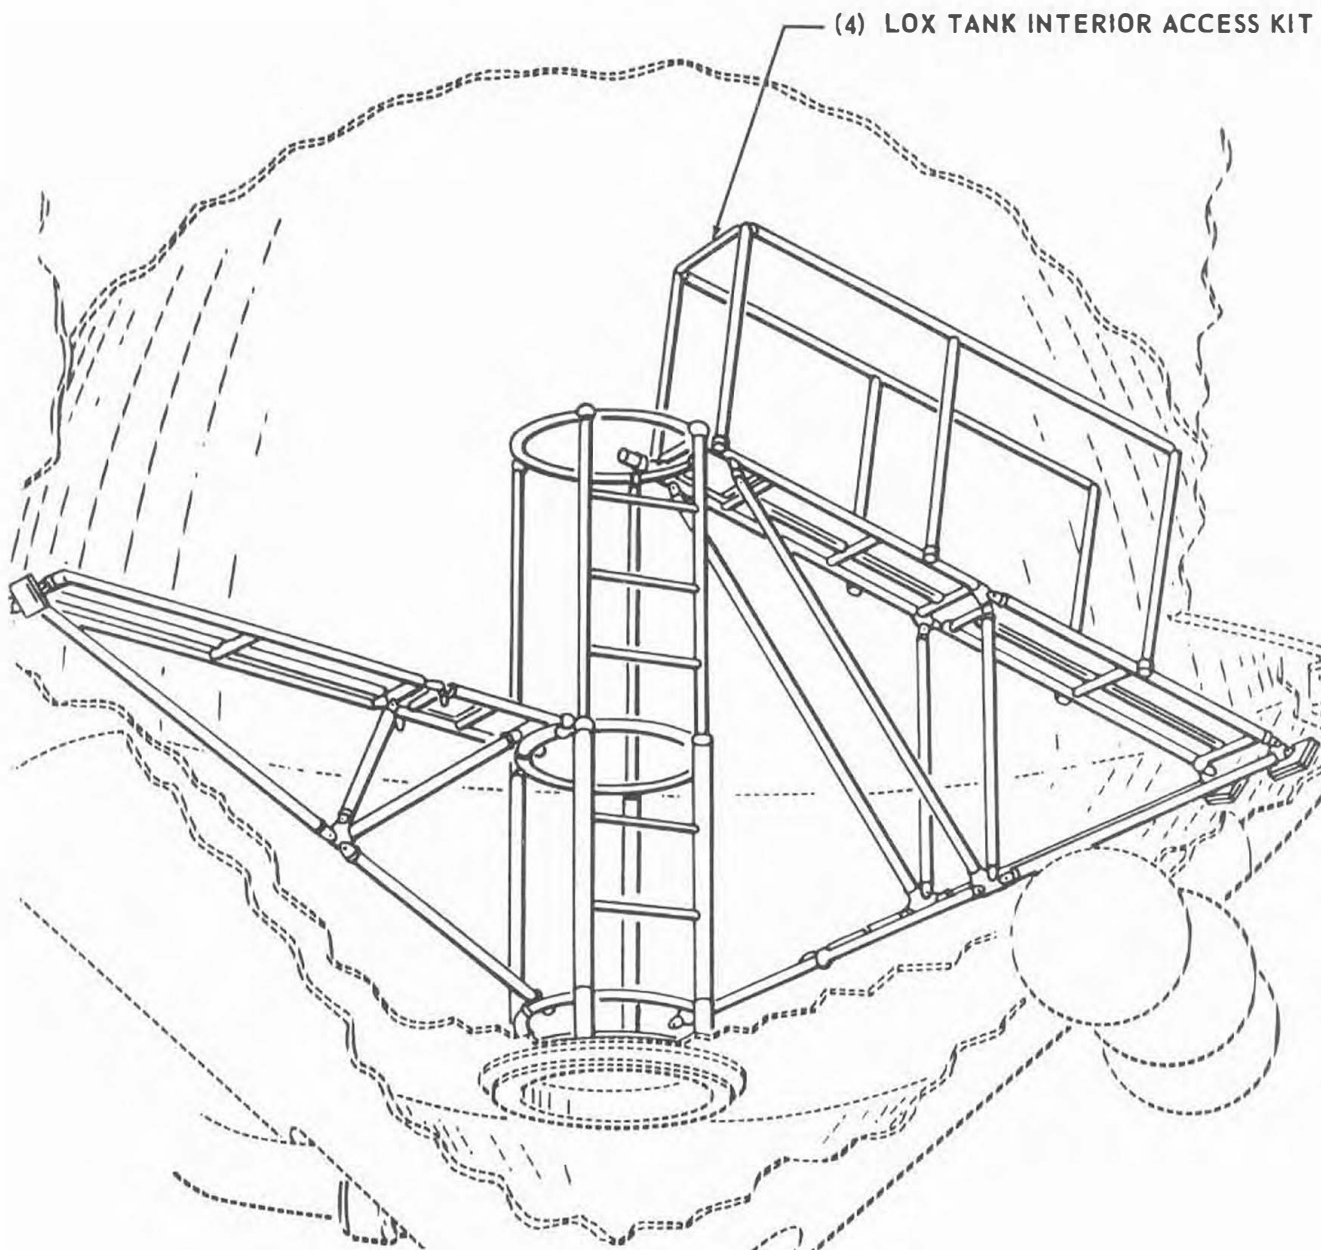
S-IVB Access Equipment (Sheet 4 of 4)
